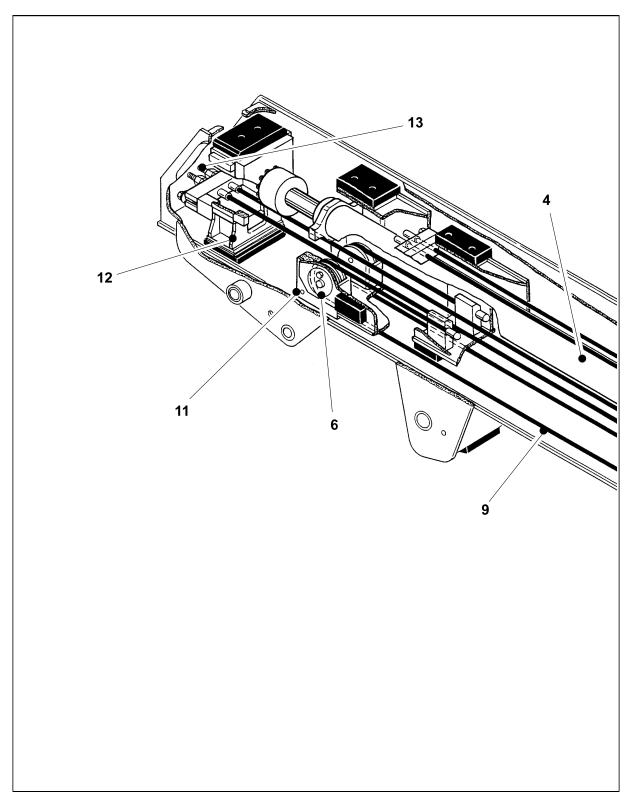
Boom Assembly Cutaway - Sheet 1 of 3
